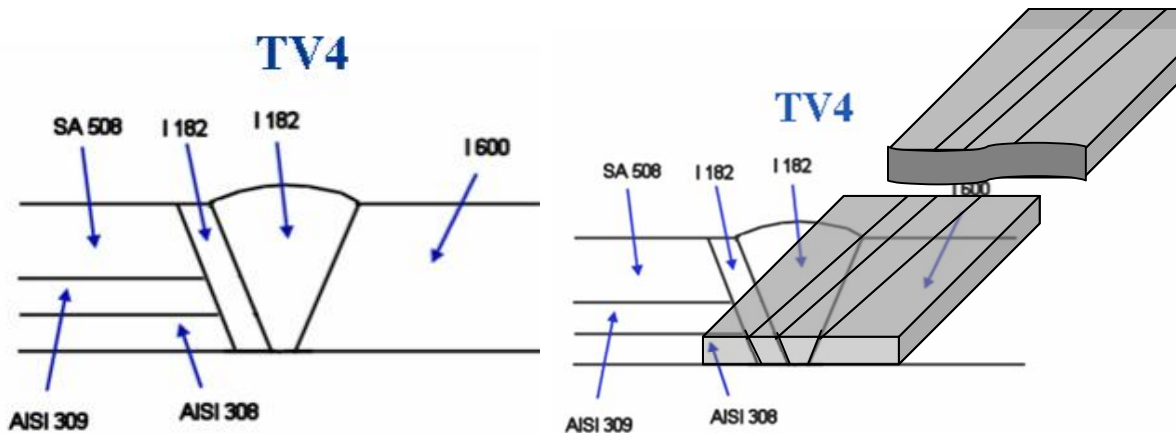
Geometry of dissimilar weld TV4 (left) and a schematic of the region from which the longitudinally-oriented four-point bend specimens were extracted at the weld root.
